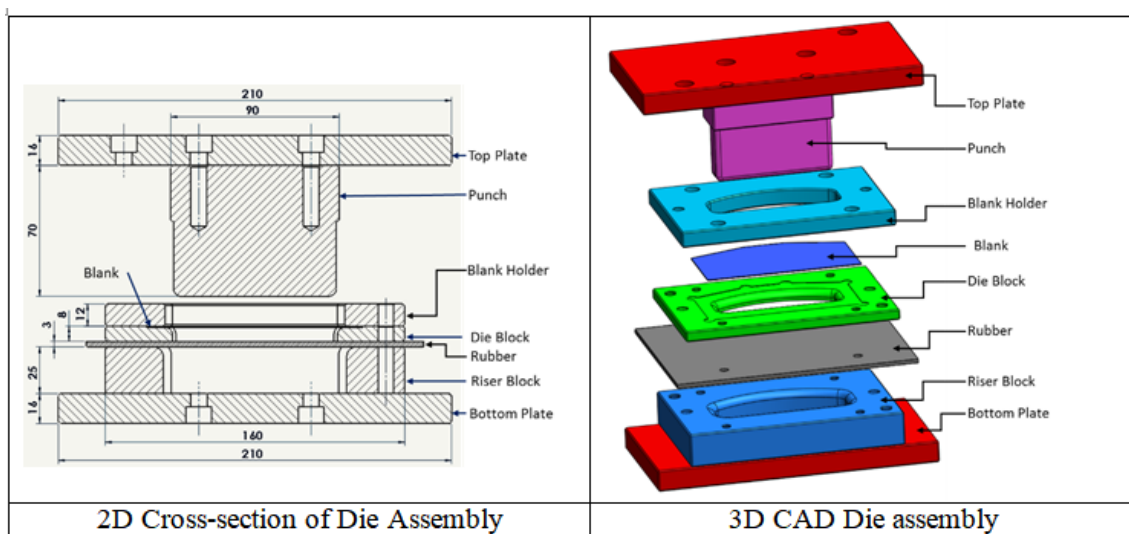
Tool Assembly for forming of Non-symmetric Component
